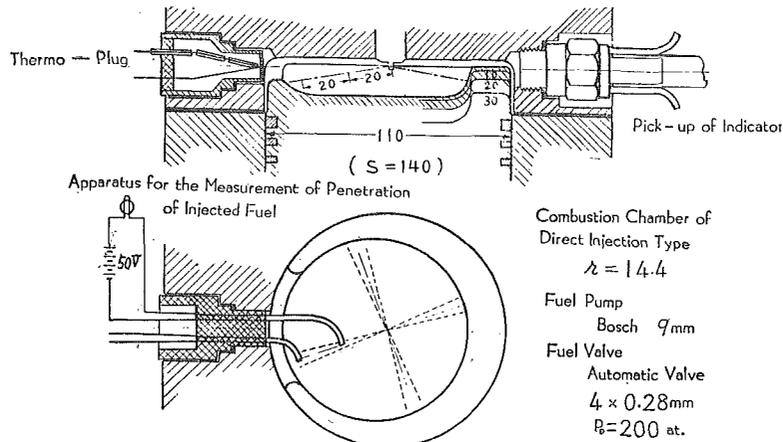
Details of Combustion Chamber, Thermo-Plug and Device of Measuring Penetration of Fuel.
